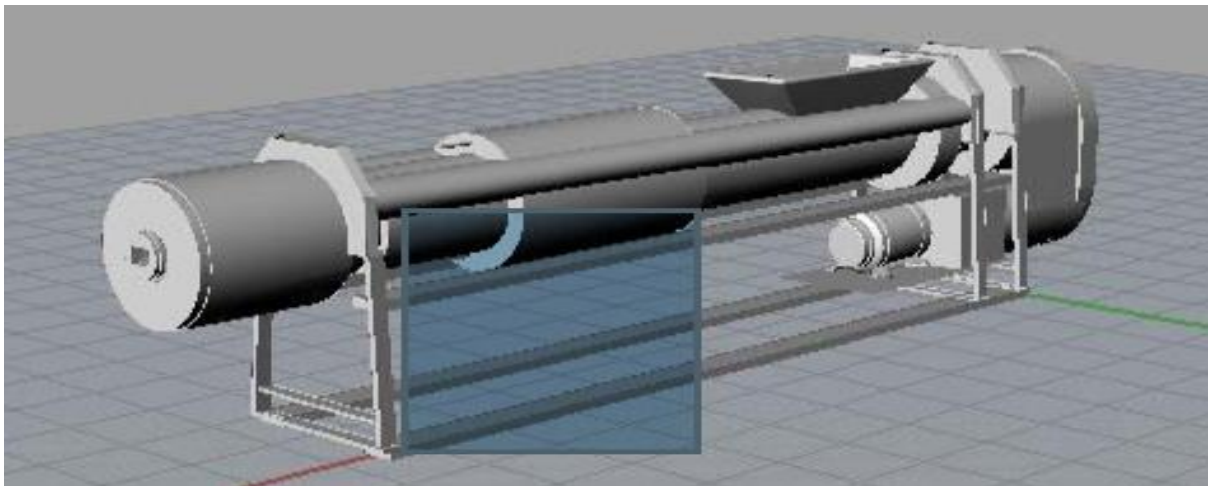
to 12 show the solidworks design of the component part and full drawing of soap extruder using solidworks design software programme.
